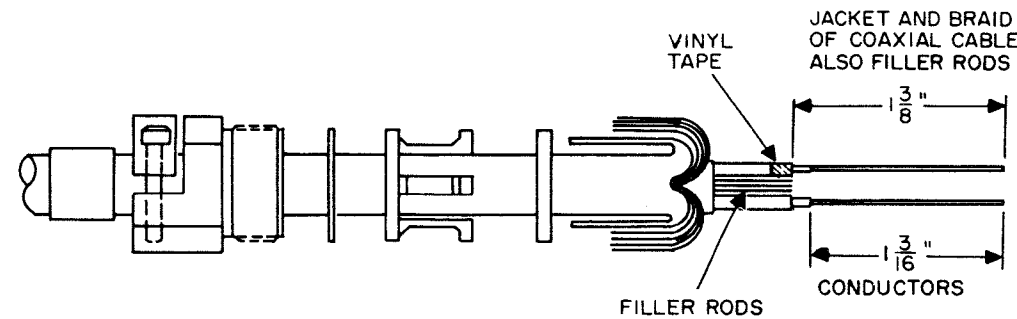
A. Assembly Instructions for Water-tight Connector Assembly P103 for Antenna AT-317A/BRR.
